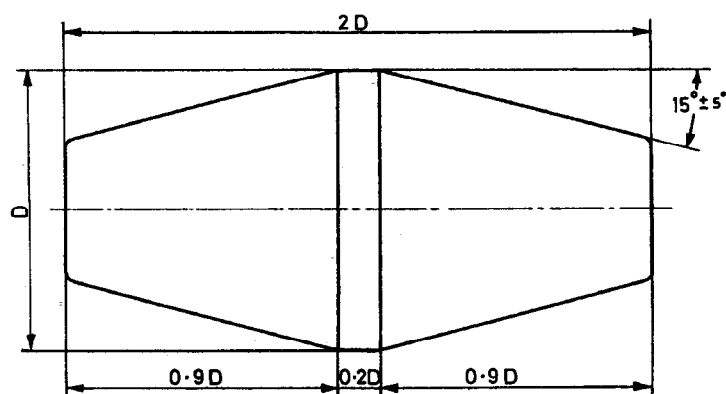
GAUGE E FOR CHECKING MINIMUM OUTSIDE DIAMETER OF CONDUITS
